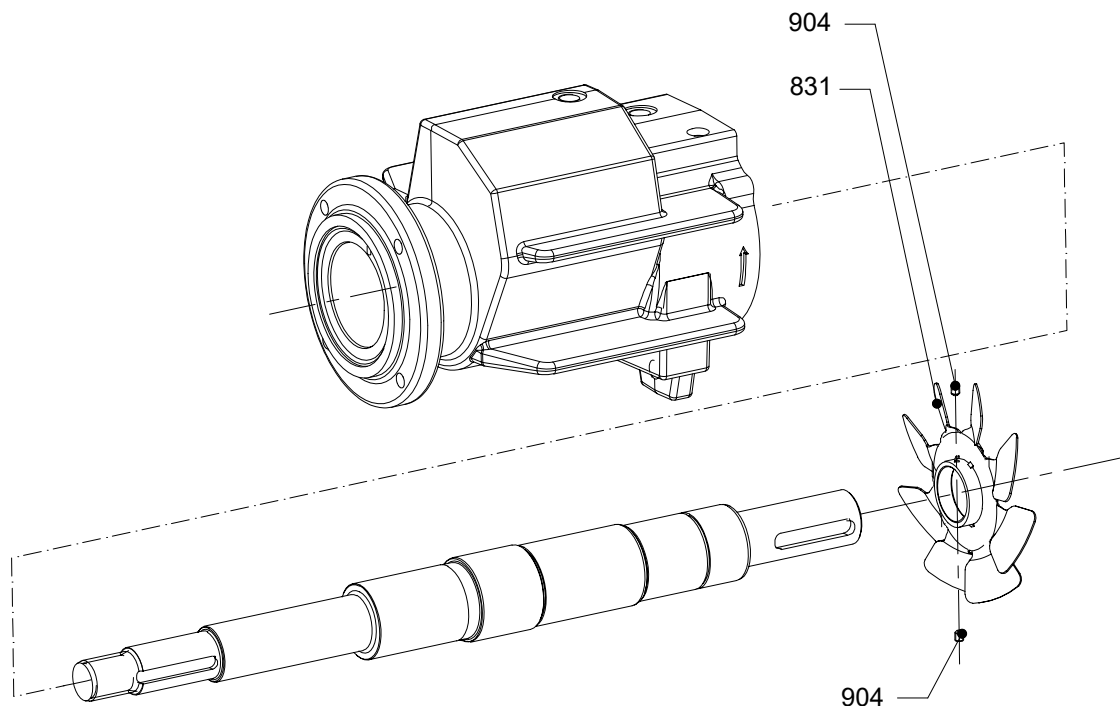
Exploded view of Etanorm SYT, bearing bracket WS_35_LS with SiC plain bearing
